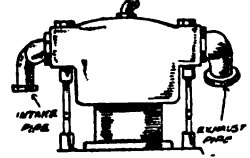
"T" head type of cylinder with exhaust manifold on one side and intake manifold on the opposite side.
